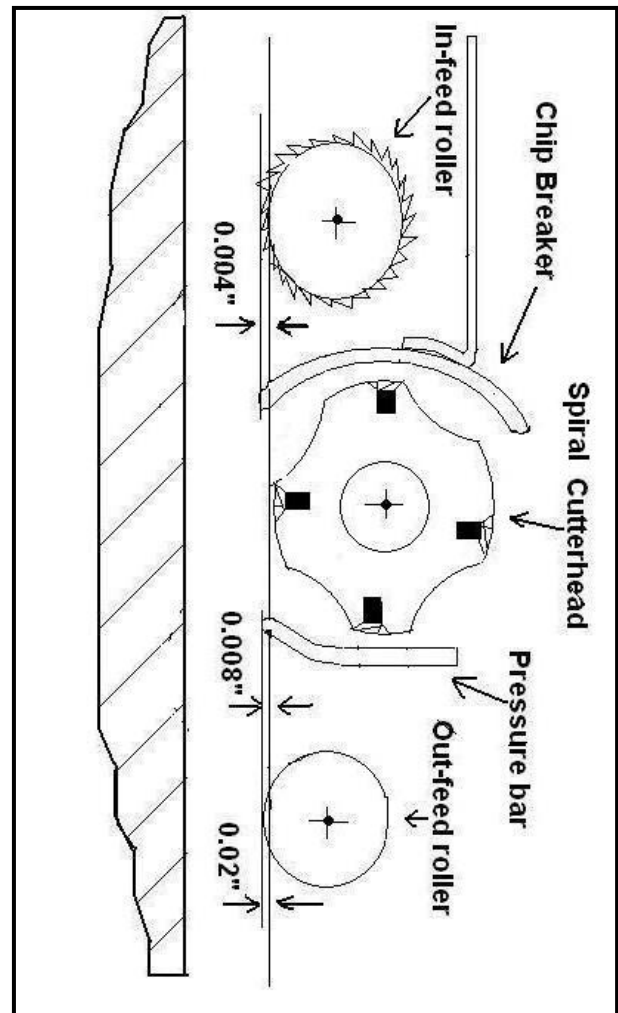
Adjusting chip breaker & pressure bar with the cutter-head
